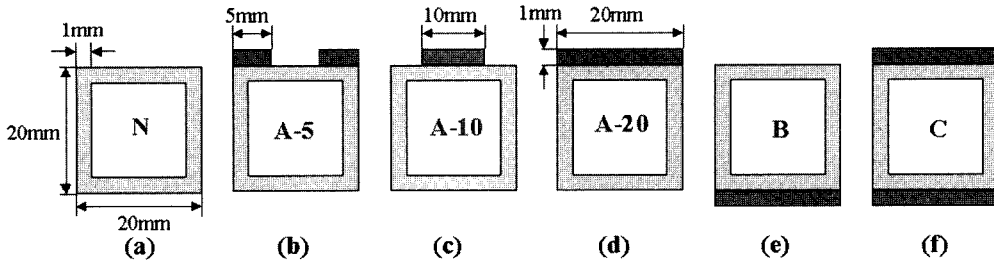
Cross-sections of various aluminum tube beam specimens: (a) unreinforced tube beam, (b) sided upper half-flange reinforcement, (c) centered upper half-flange reinforcement, (d) upper full flange reinforcement, (e) lower full flange reinforcement and (f) upper and lower full flange reinforcement
